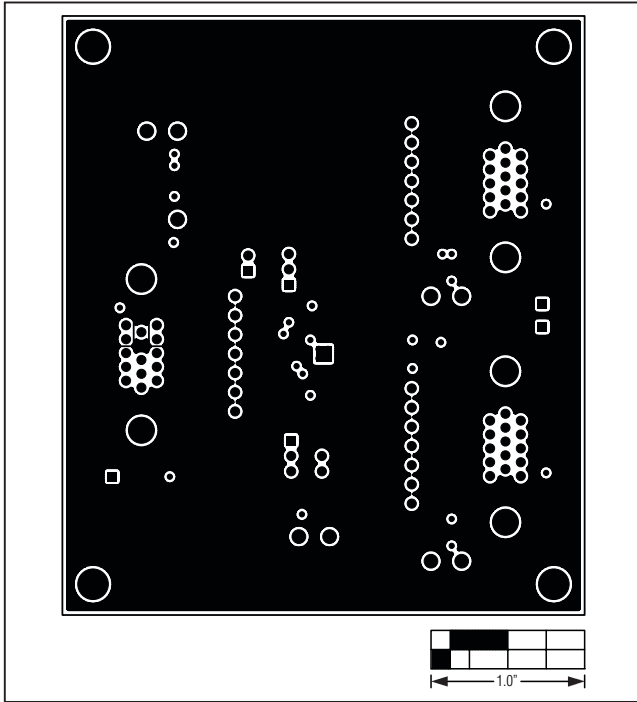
MAX4885AE EV Kit PCB Layout—VCC Layer 3
